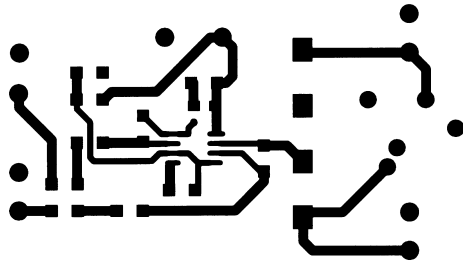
Recommended SOIC PC Board Layout: Top Layer
